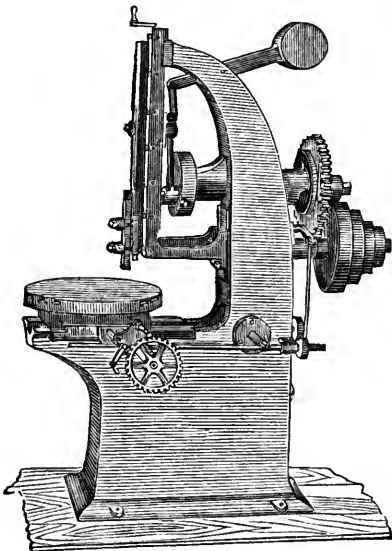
SELLER'S SLOTTING-MACHINE.
